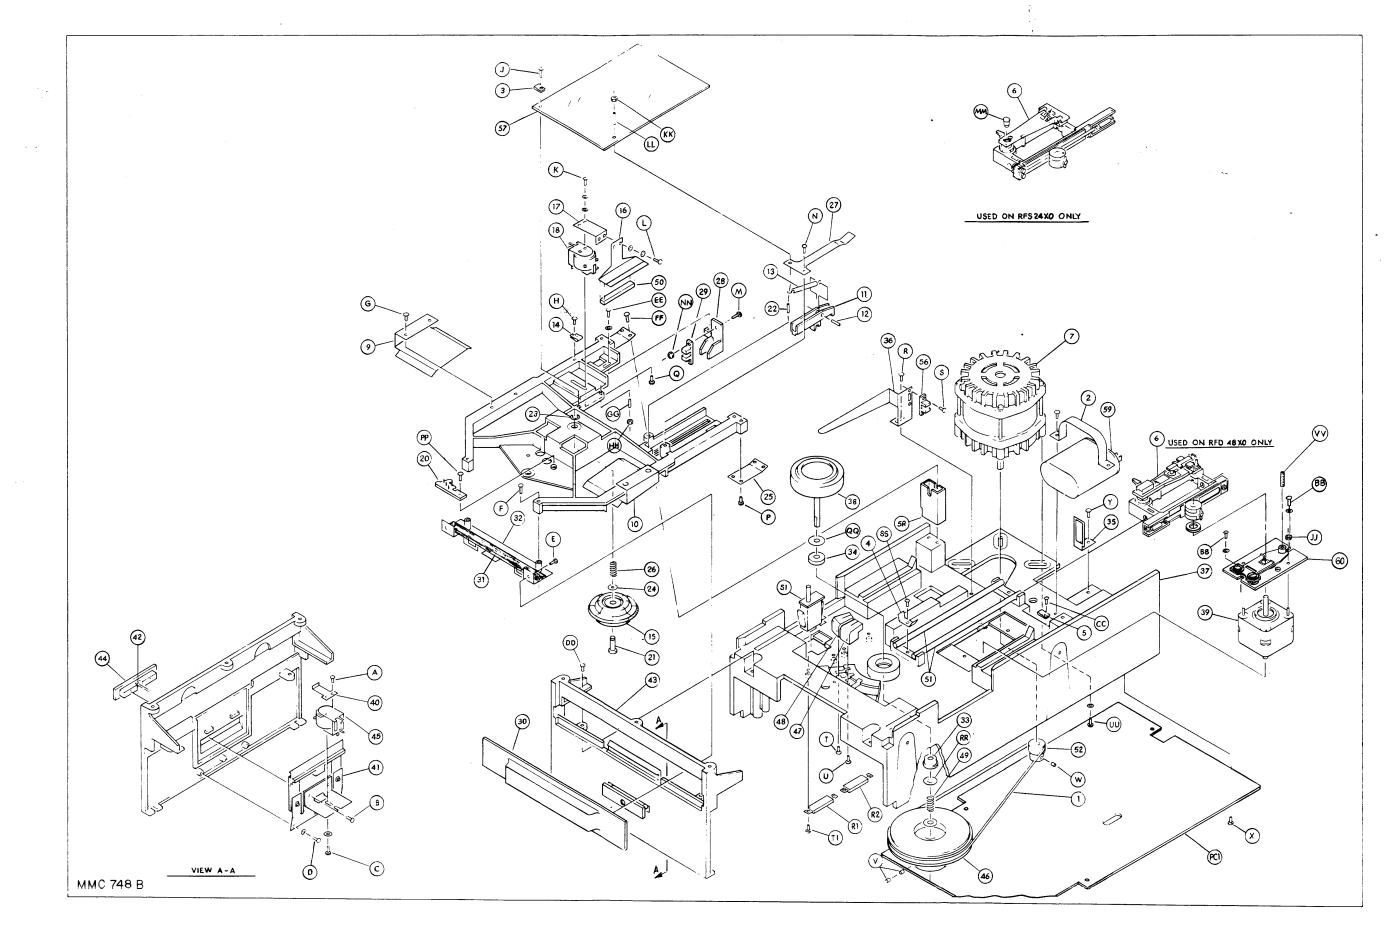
Exploded View of RFS48X0 and RFS24X0.
